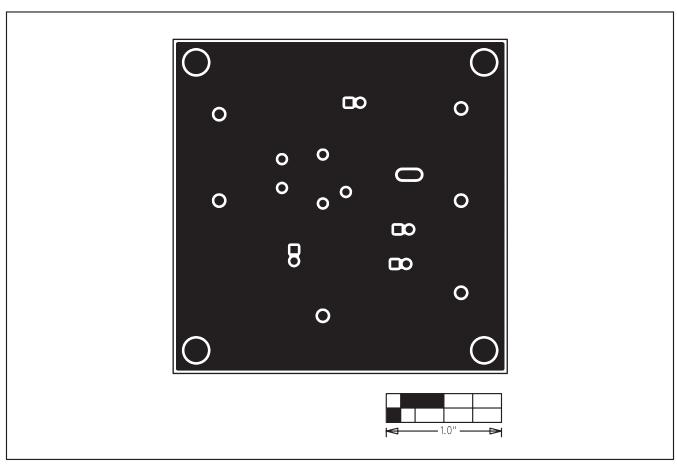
MAX7453 EV Kit PCB Layout—Solder Side
